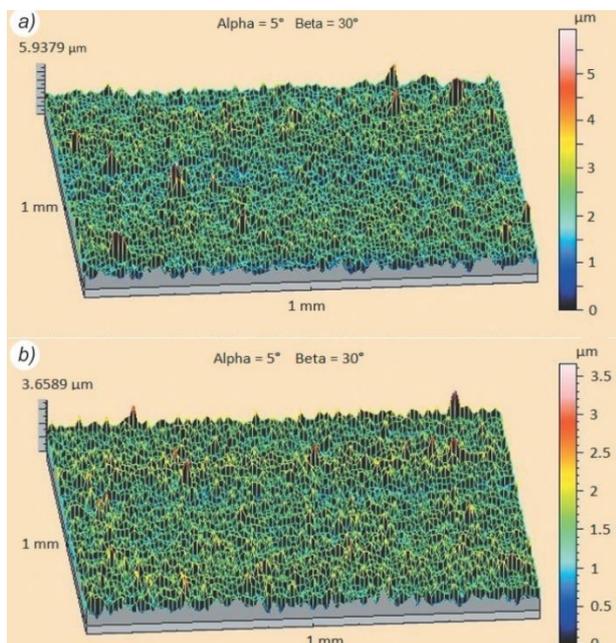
Surface stereometric image: a) after machining using electrode $\phi 0.25$ mm, b) after machining using electrode $\phi 0.15$ mm
